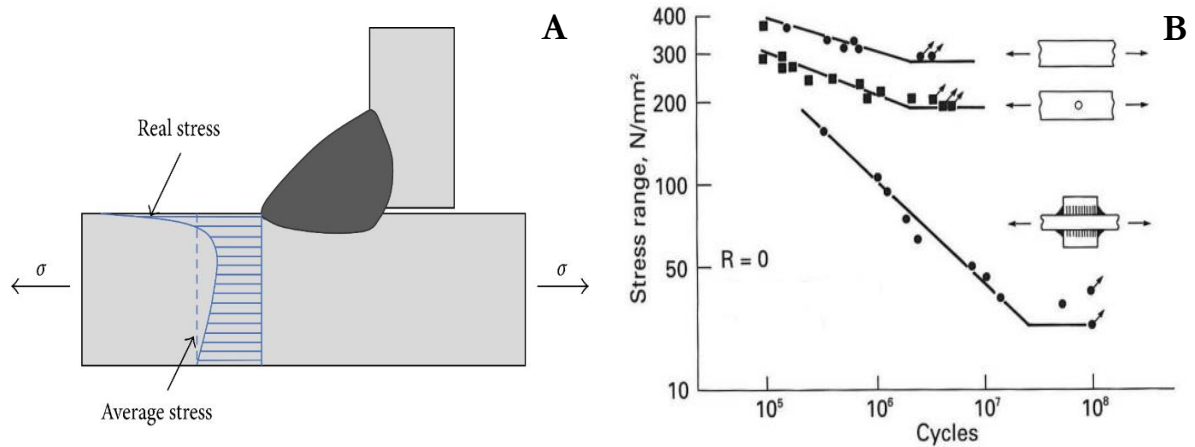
(A) Welded joints are stress concentrators<sup>30</sup>. (B) Fatigue strength of plain, notched, and welded structure.
